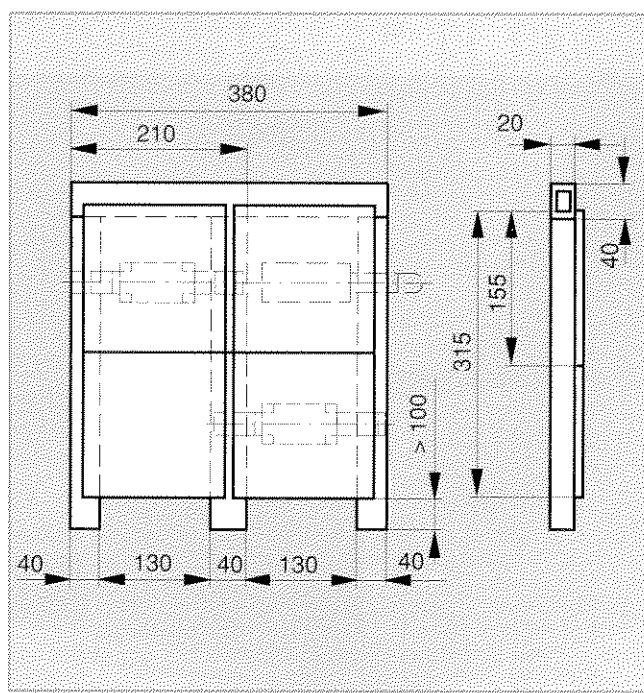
Twin-section mounting frame to accept Size 6 elements
